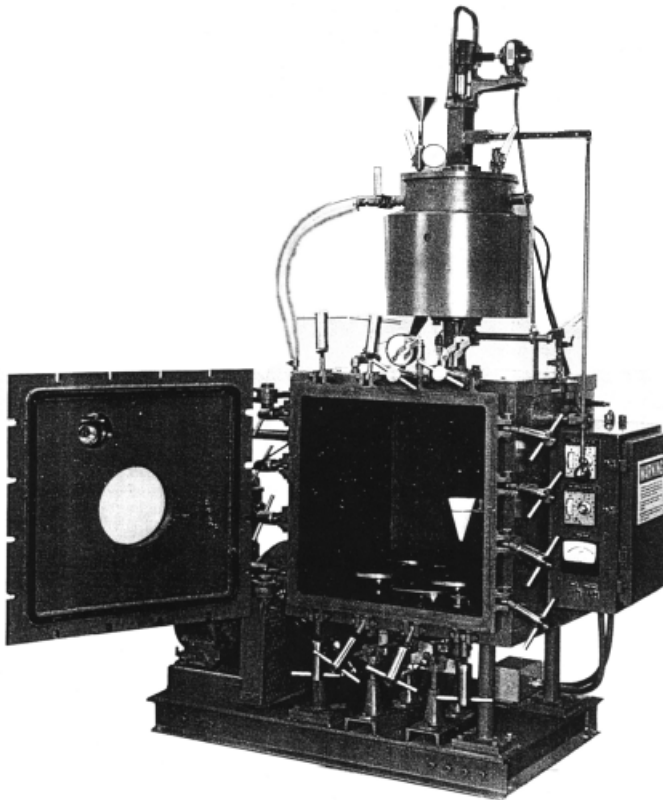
Vacuum–pressure potter showing planetary turntables and a director funnel in a casting chamber. Note the handle (in front of the upper timer on the control cabinet) to enable the operator to move the stirrer shaft down to puncture the bottom of the disposable resin/catalyst container in the upper degassing chamber, then to meter flow of mix through the director funnel into molds. Planetary turntables are rotated with handles beneath the casting chamber, positioned conveniently for the operator to manipulate while sitting in front of the sight glass and viewing the funnel and molds to ensure a complete fill. (Courtesy of Hull-Vac, Inc., Warminster, PA).
